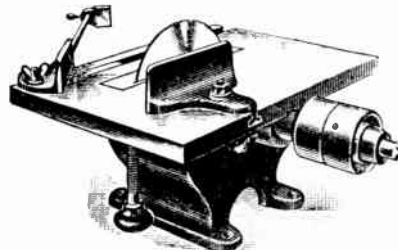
SMALL BENCH CIRCULAR SAW WITH 6-IN. DIAM. SAW, SPINDLE ON BALL-BEARINGS.
